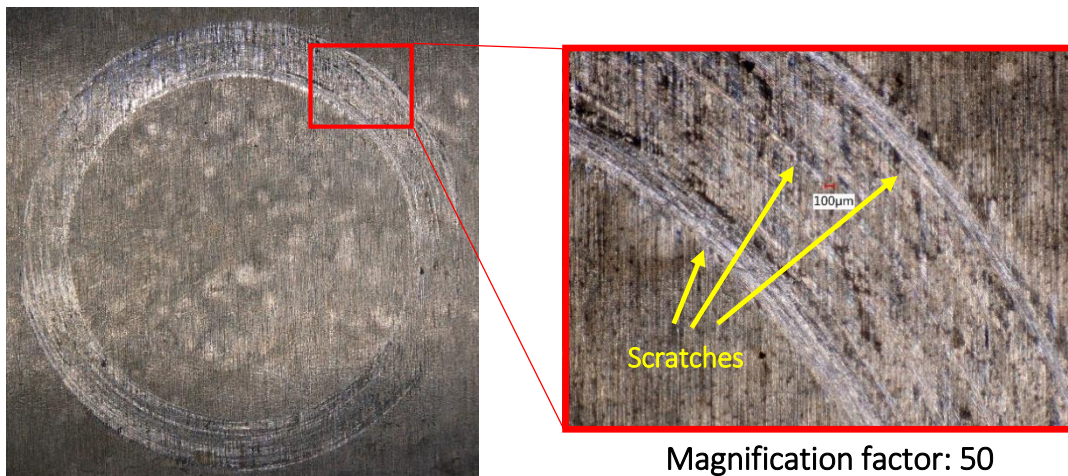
Visual inspection of the AA70XX T6 sheet specimen after testing with Fuchs at 230°C
